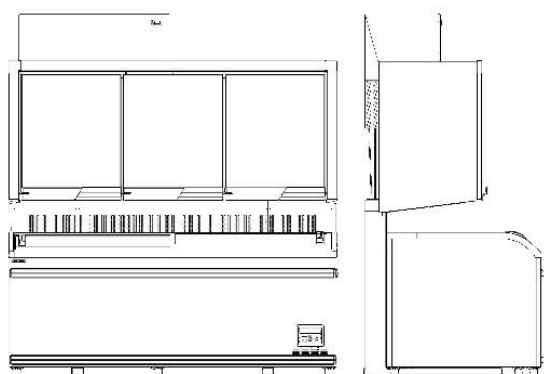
/1: Wall installation: KINLEY with refrigerator/freezer at bottom (front and side view) – symbols
